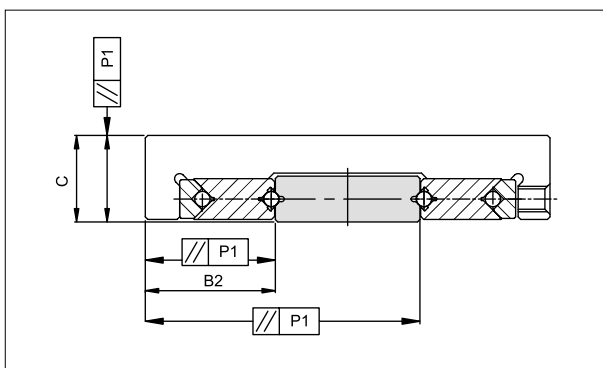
Tolerances PNUA recirculating assemblies
